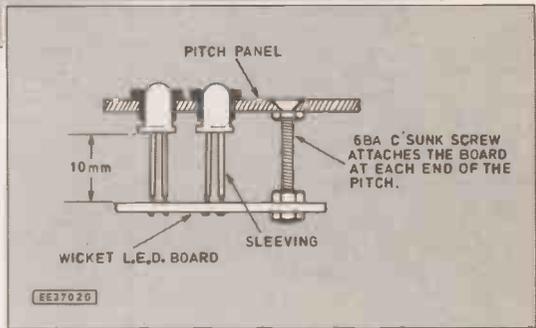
How the l.e.d.s are mounted on the subsidiary "wicket" board and fixed to the pitch panel.
